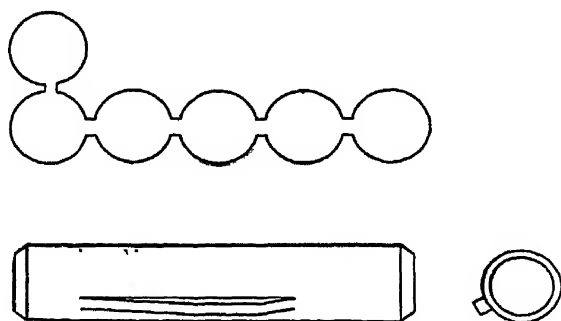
EASILY MADE TOOL FOR CUTTING HOLES INTO ONE ANOTHER
